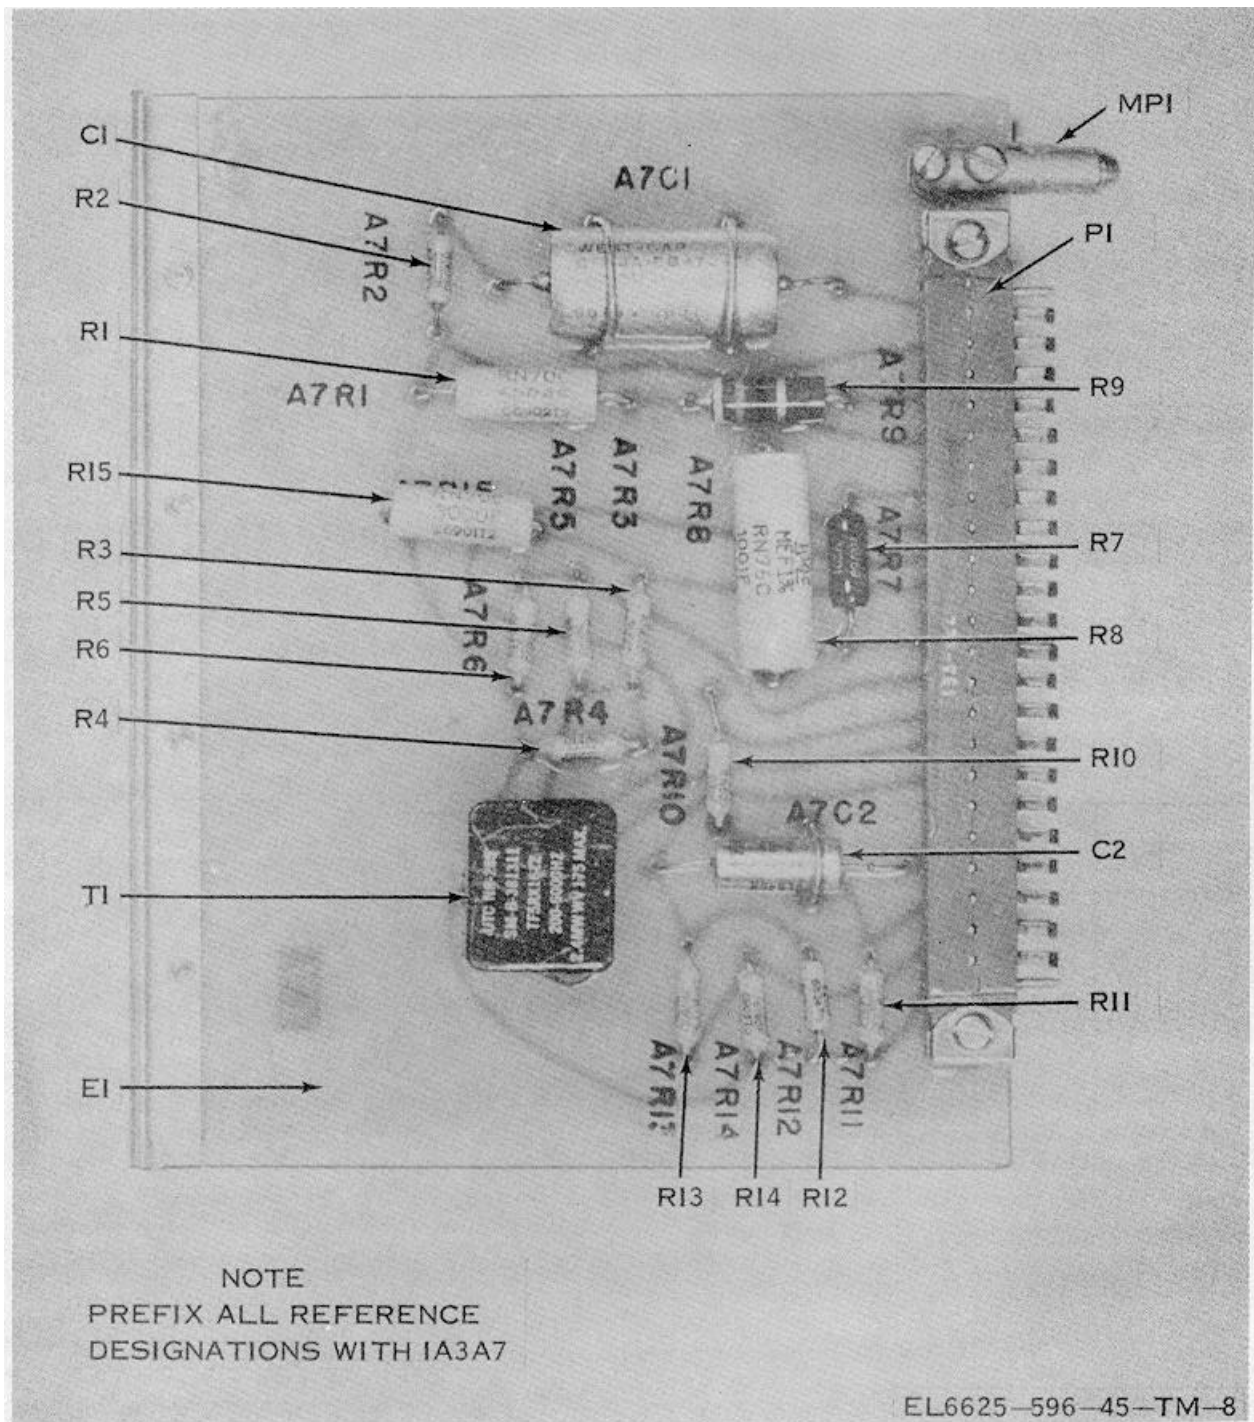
Transmission efficiency assembly 1A3A7, parts location.
